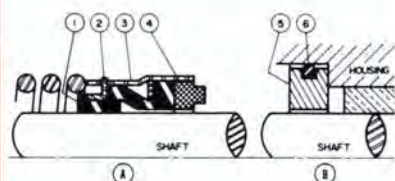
1. Bellows. "Tail" is interference fit on the shaft, 2. Drive band, 3. Retainer, holds parts together and drives rotating washer, 4. Rotating face, 5. Stationary seat, 6. Seat gasket (O-ring).
